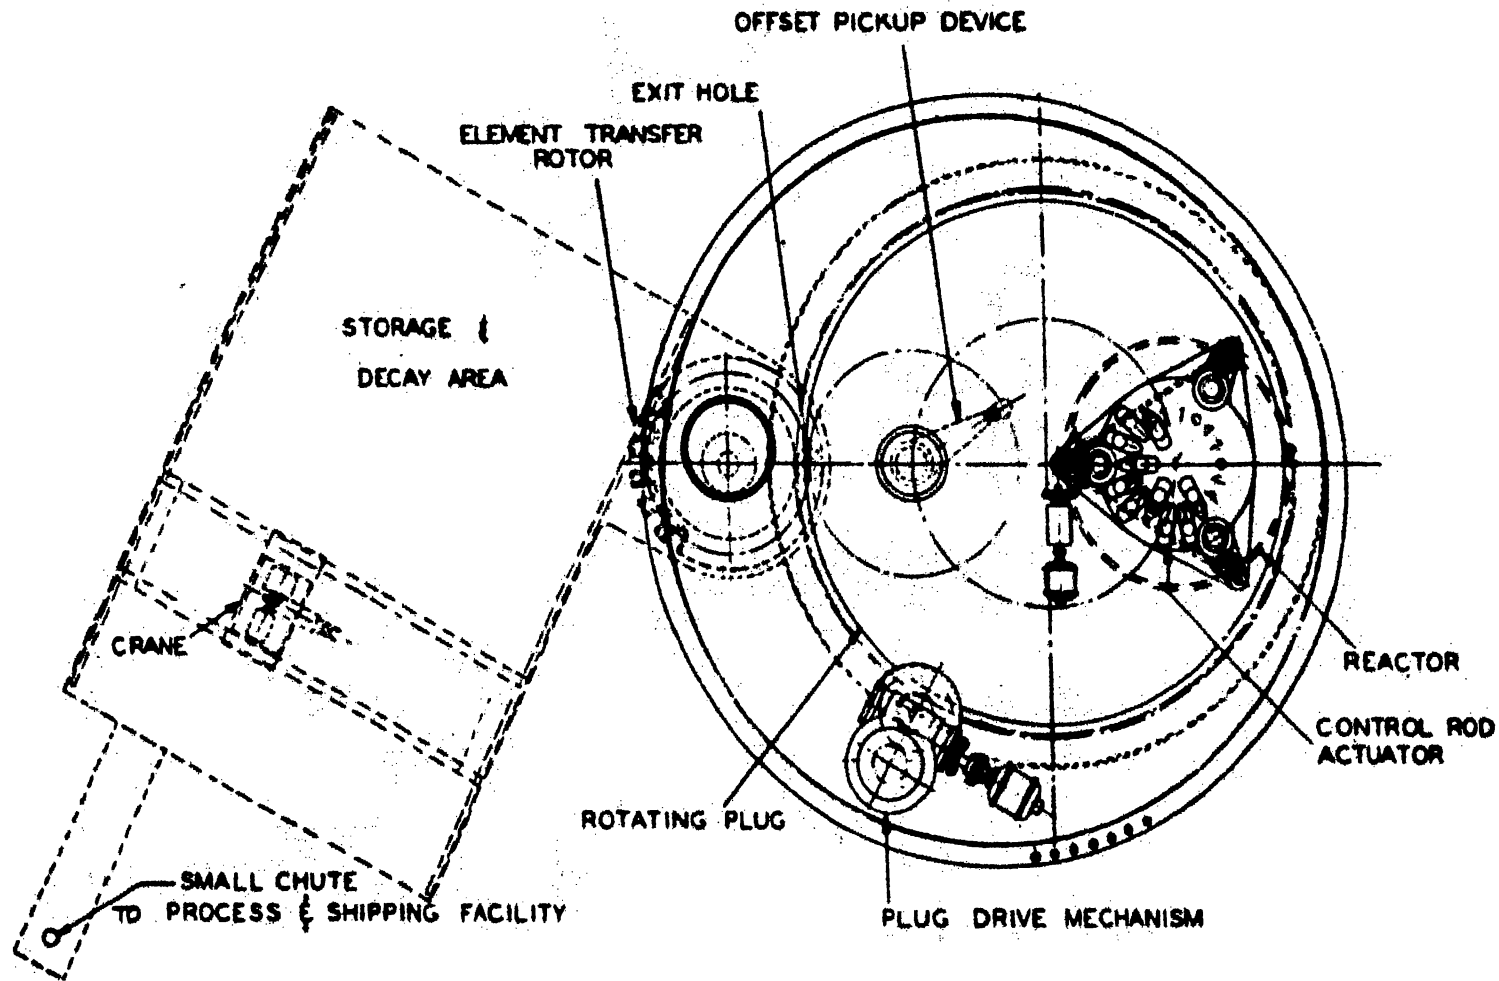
ELEMENT HANDLING MECHANISM (PLAN)
